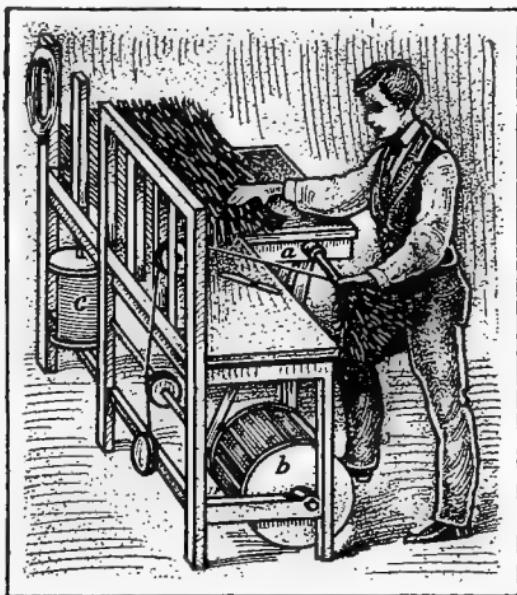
Tread-power machine for the manufacture of brooms by hand.
